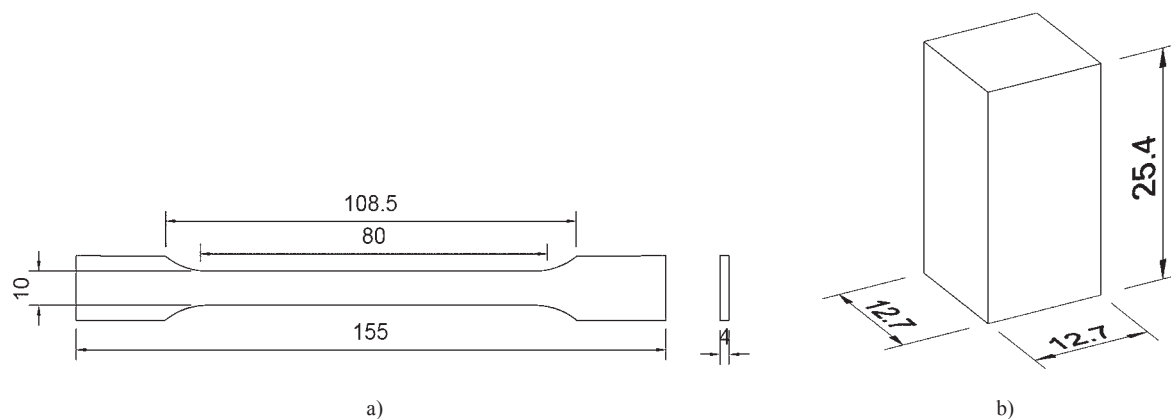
Test specimens: a) tensile strength testing, b) compressive strength testing
